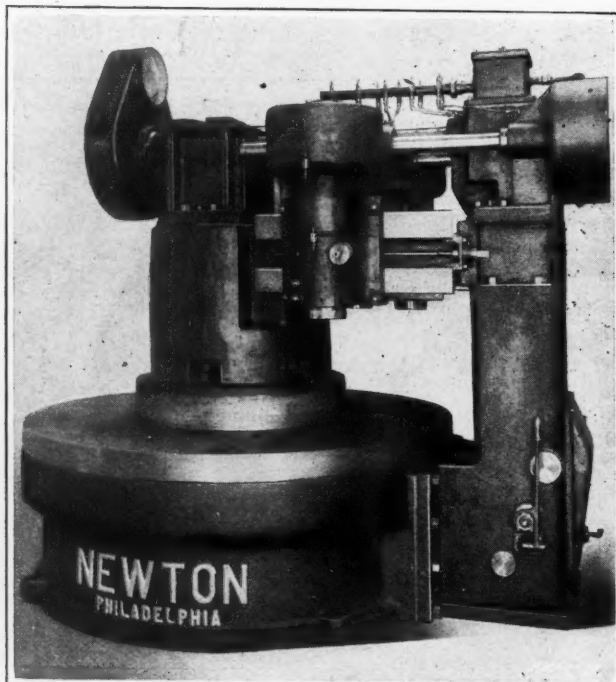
Opposite View of Machine shown in Fig. 1, illustrating Finishing Spindle
